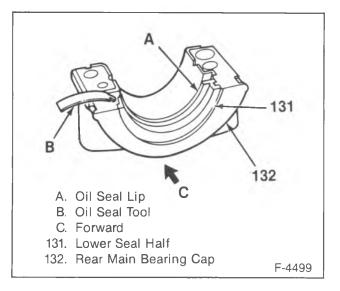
Crankshaft Rear Oil Seal Installation (7.4L Engines)
